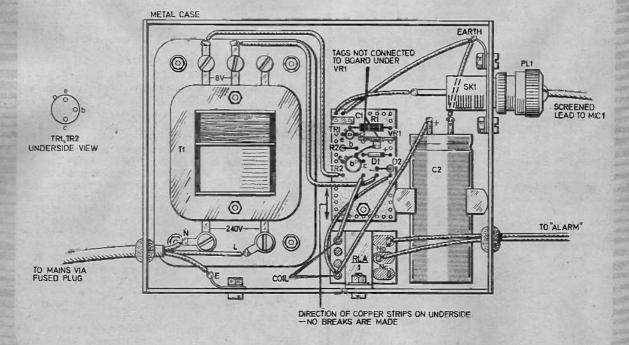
Layout of components on the Veroboard and complete wiring up details within the case.
